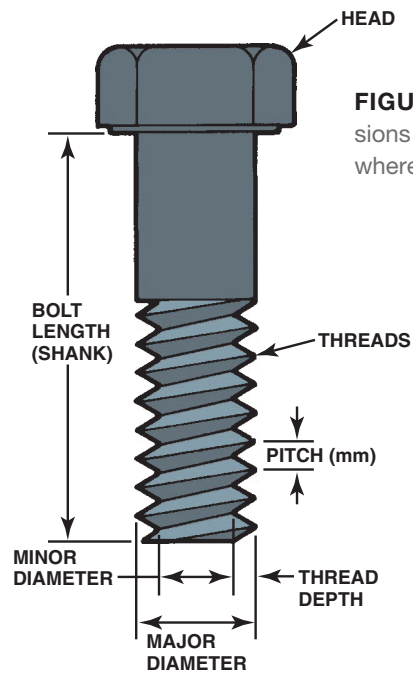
The dimensions of a typical bolt showing where sizes are measured.
